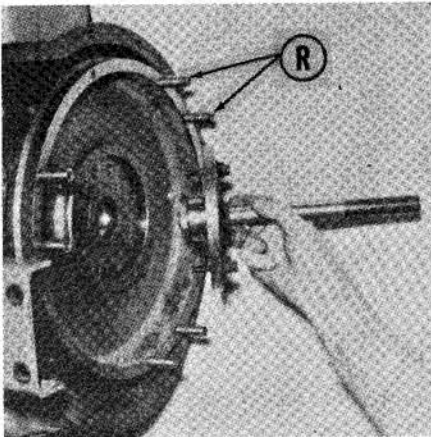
Attaching spindle and risers (R) of clutch assembly and adjustment fixture to engine flywheel.
